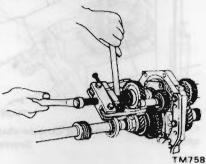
Removing Counter Overdrive Gear and Bearing
